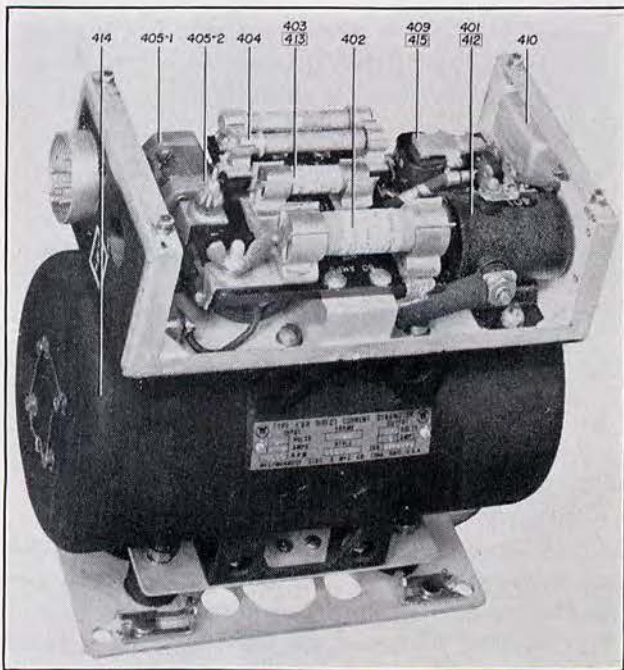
DYNAMOTOR UNIT PE-59-A OR PE-62-A, COVER REMOVED
